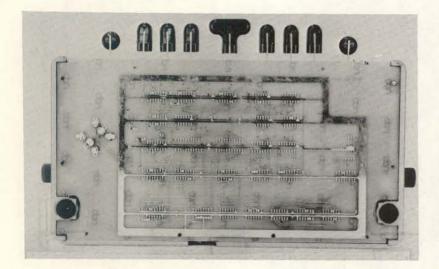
Back side of Brailler CKT Board Mounted on Perkins Brailler
